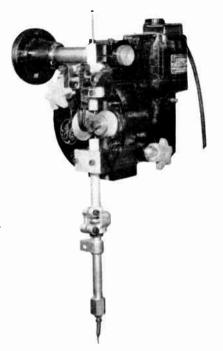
Thyratron-controlled automatic arc-welding head
